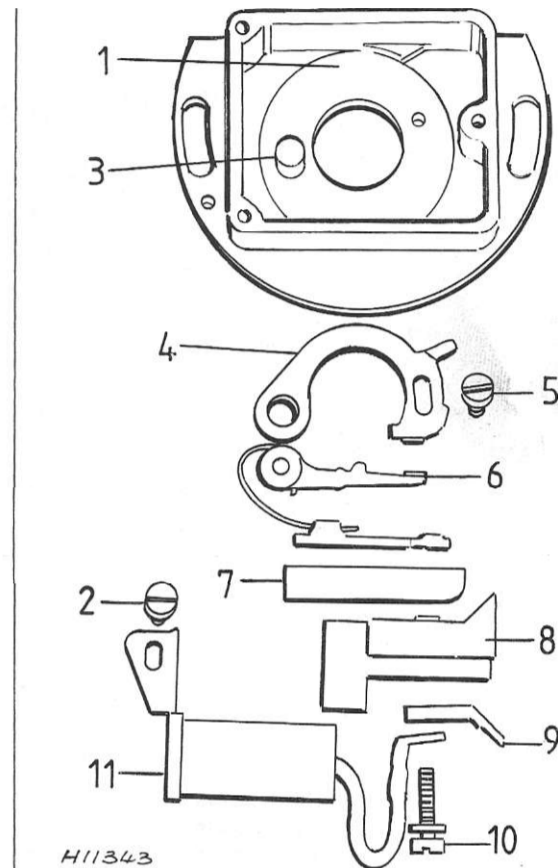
The contact breaker points box assembly (Sec 4)
